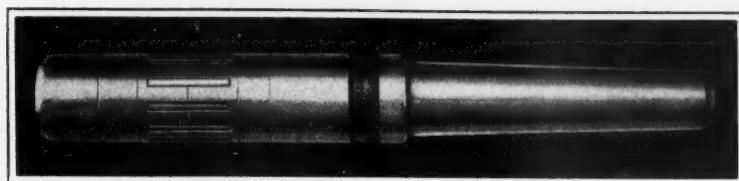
"Bearing-izer" which Produces Highly Finished Bearing Surfaces in Holes through the Peening Action of a Series of Shafts
